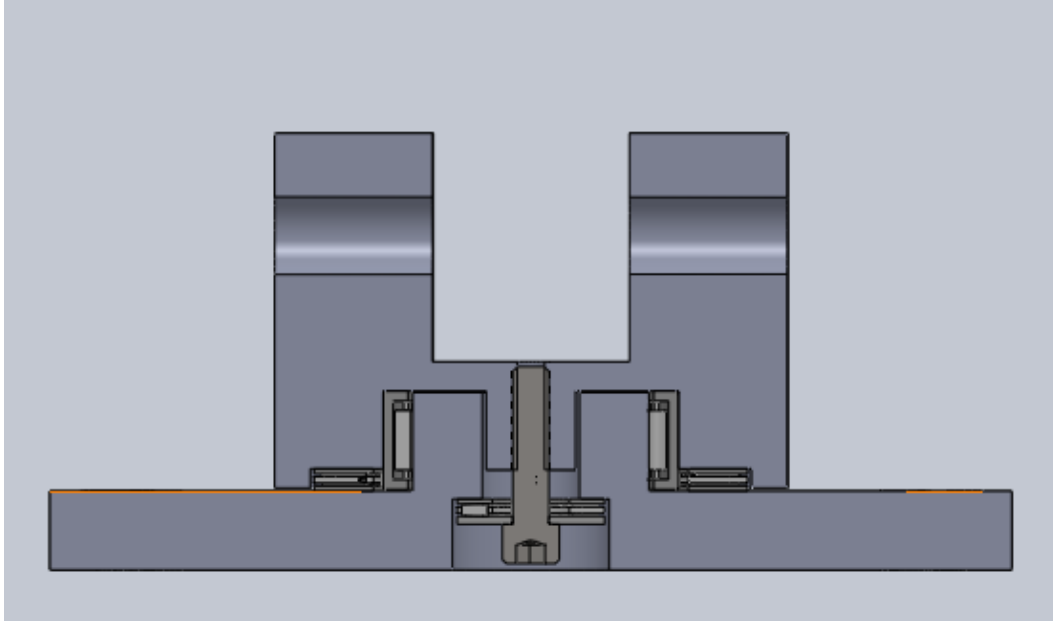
Section view of clevis mount assembly showing bearings and hex bolt
